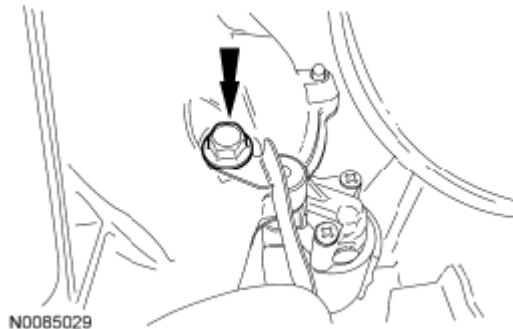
Locating Transmission Fluid Cooling Tubes Rear Support Bracket Bolt
